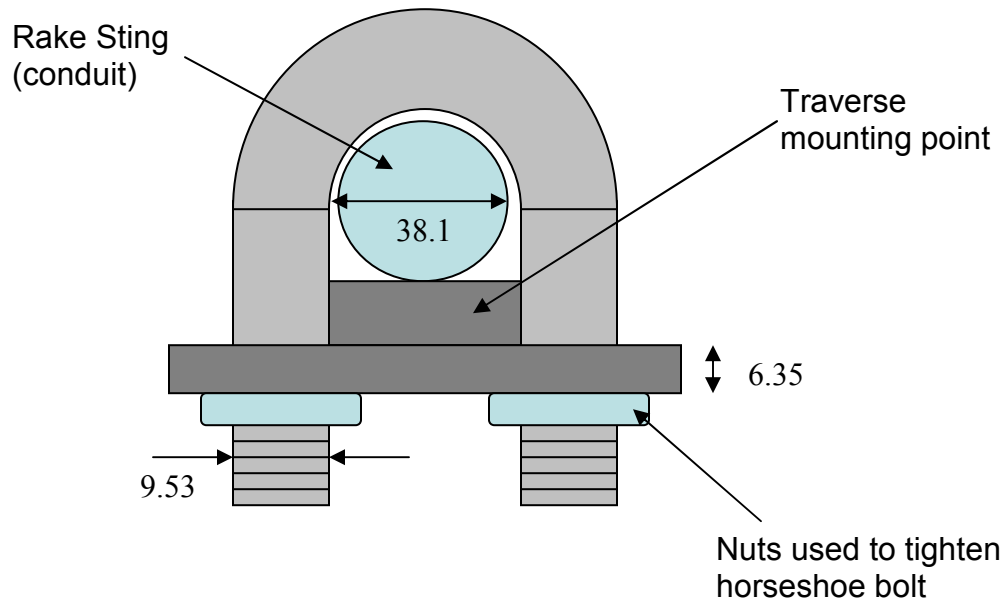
Horseshoe mounting bolt used to secure conduit sting to the wind tunnel traverse. All dimensions in mm.
